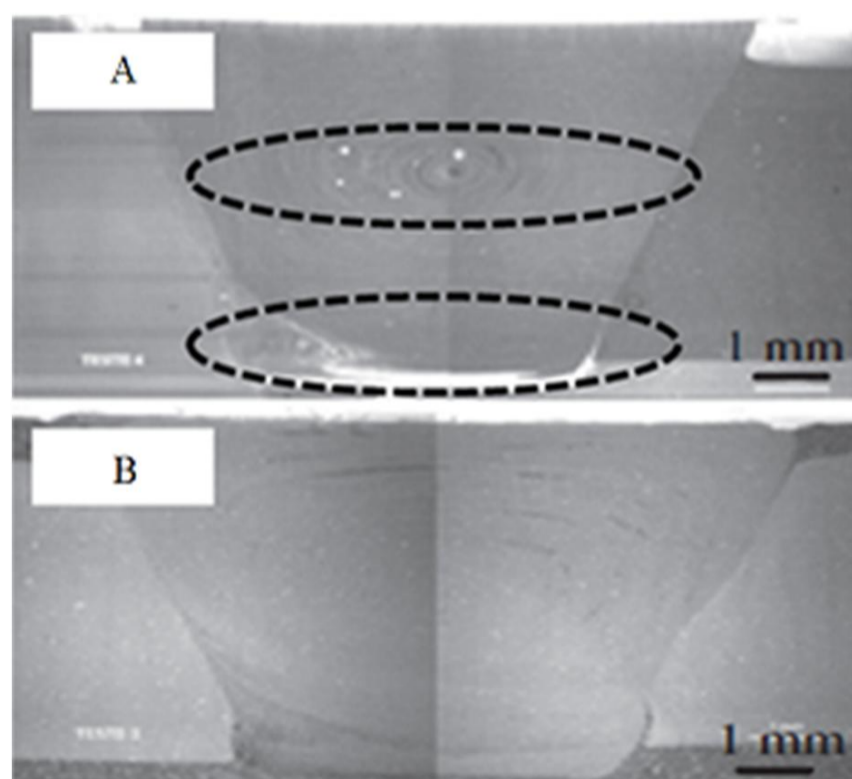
Macrostructure of the weld zone (A) without vibration (Test No. 7) (B) with vibration (Test No. 16)
